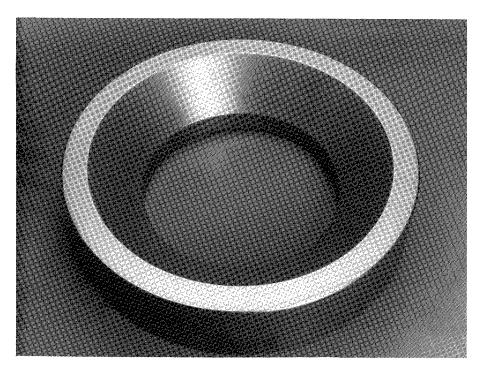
Annular Optic Prototype As-machined by McCarter Machine
